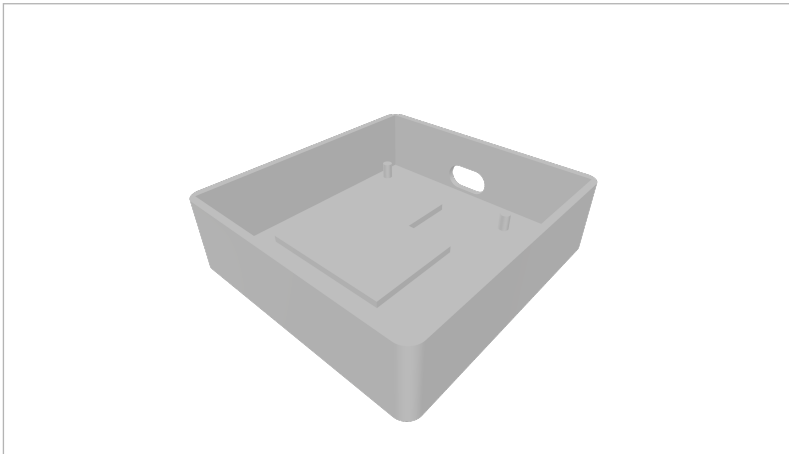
XC120 Shield. Dimensions: $78 \times 74 \times 21$ mm.
